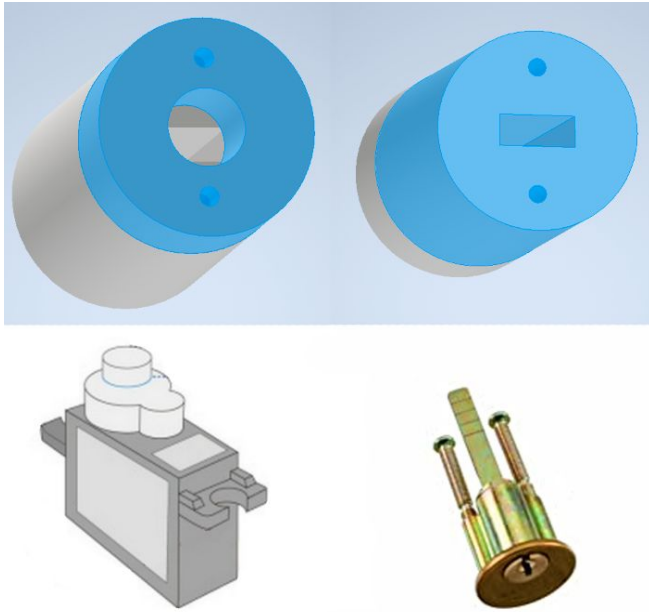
Top: CAD design of the 3D printed servo lock-cylinder tailpiece connector. Bottom: the ends at which this part will be connected.
